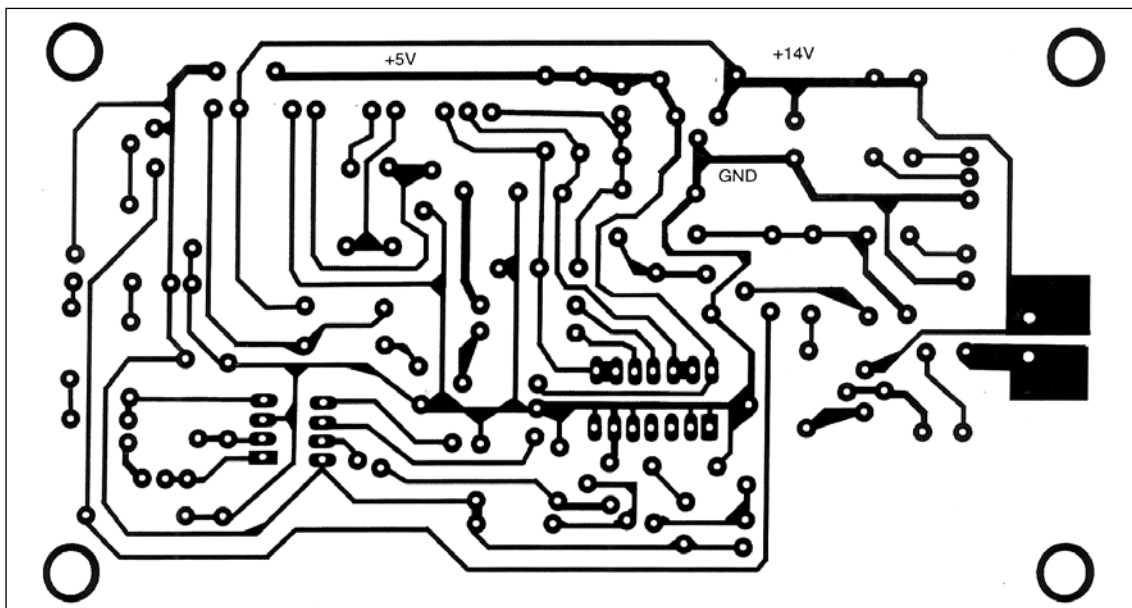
Actual-size single sided PCB for the circuits shown in Figs 2 and 3
